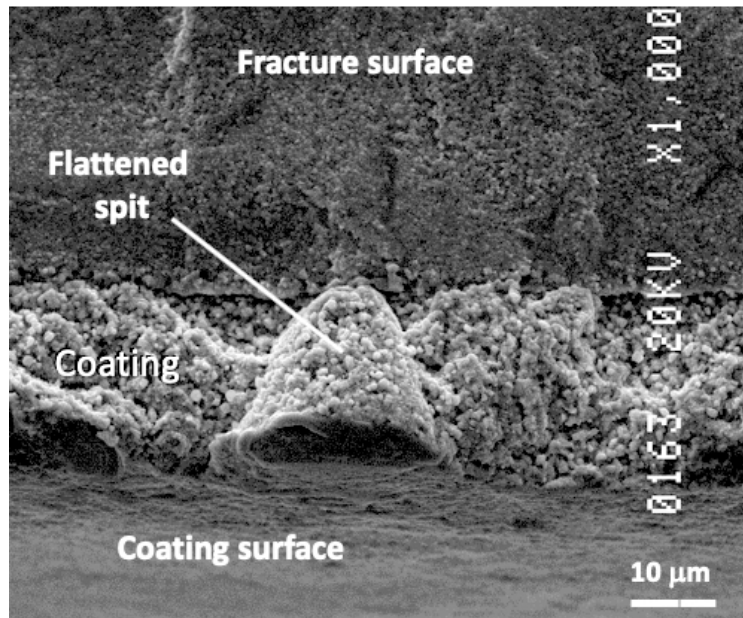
SE image of the primary crack initiation site at the edge of the fracture surface of the Low Cr, Thin coating showing a clear image of a flattened spit.
